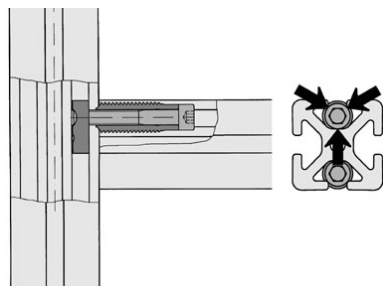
Fig. V.tif: Automatic Fastening Sets is screwed frontally in the Profile Groove
